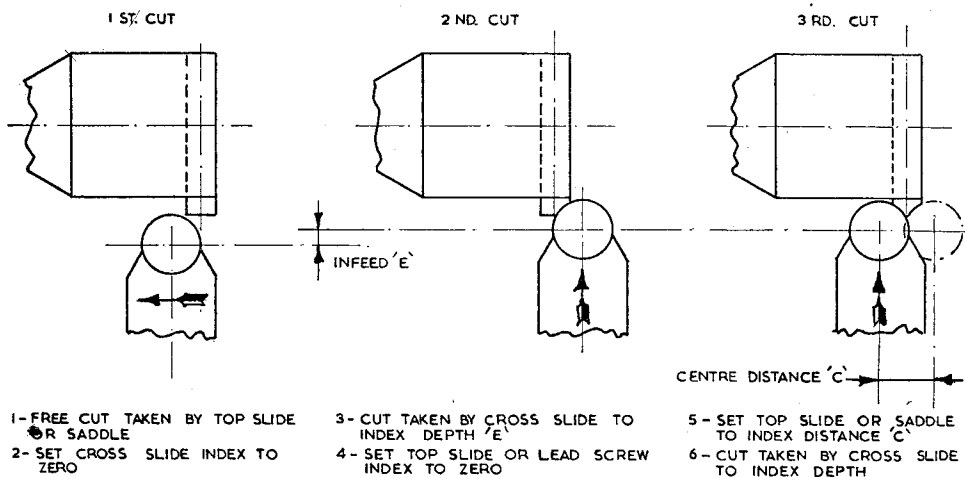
The sequence of forming both flanks of a gear tooth cutter with a single circular form tool
